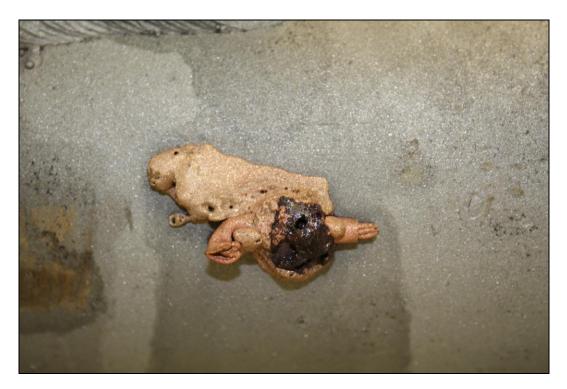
Image of the remainders of an additional piece, which had been welded then cut off, present on Side A of the assembly.
